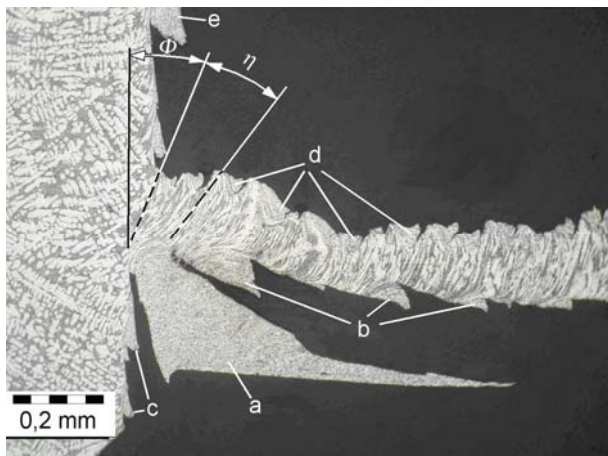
Chip base of aluminium alloy AK9 with a visible built-up edge (cutting parameters: $v_c=100$ m/min, $f=0.08$ mm/rev)
